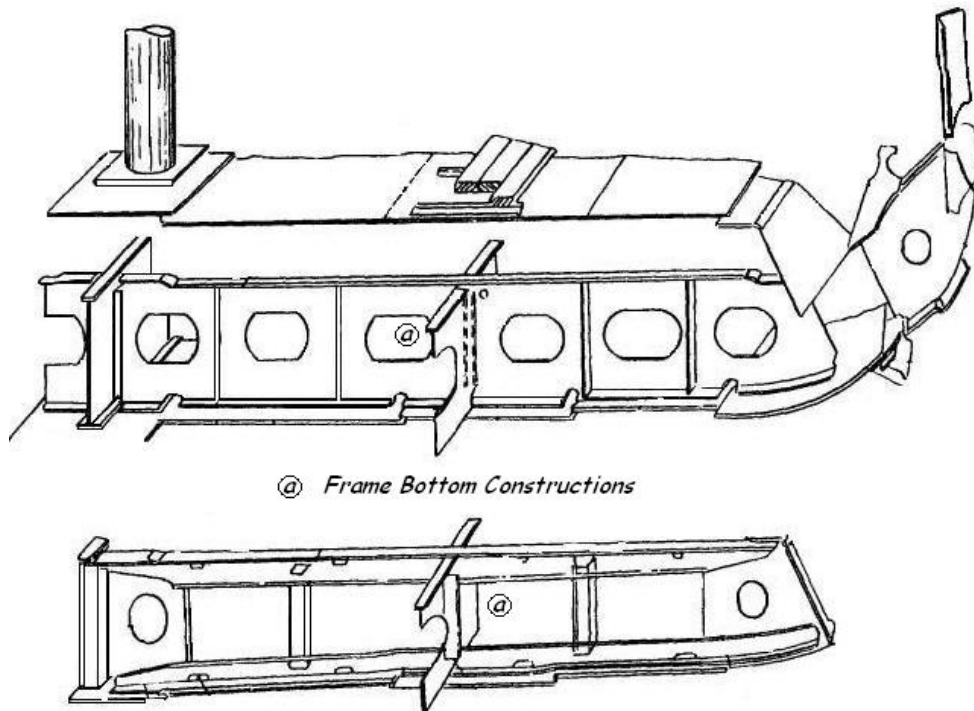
Longitudinal Framing Double Bottom Constructions (AMSP, 2006)
